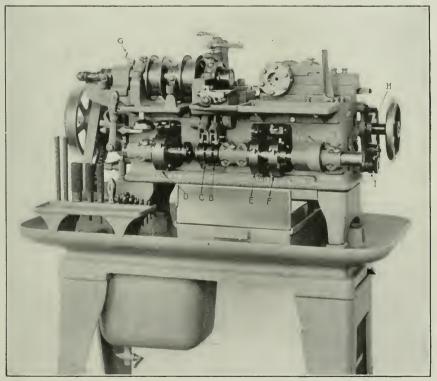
Brown & Sharpe No. 00 Automatic Screw Machine
